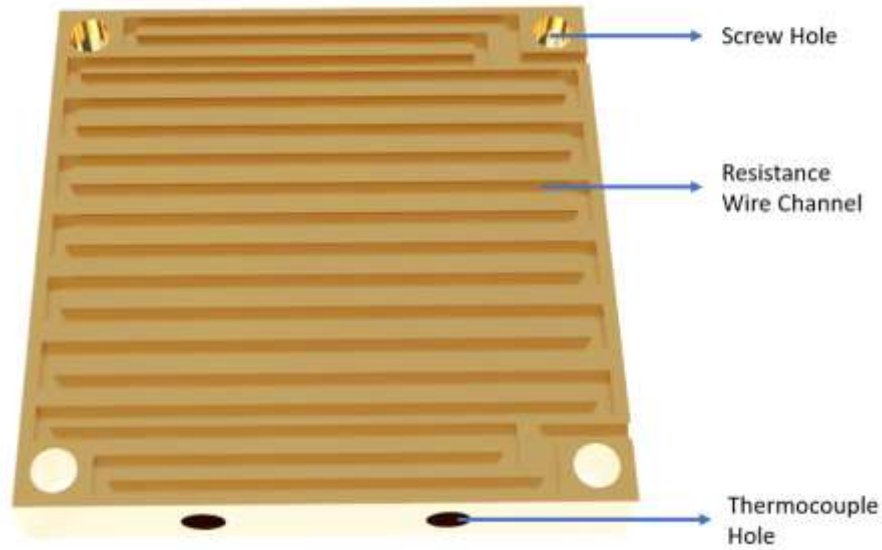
Mini channel machined brass plate for housing the resistance wire.
